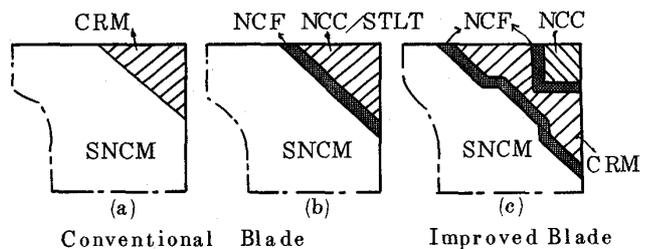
Shear Blade Structure of Conventional and Improved Type
